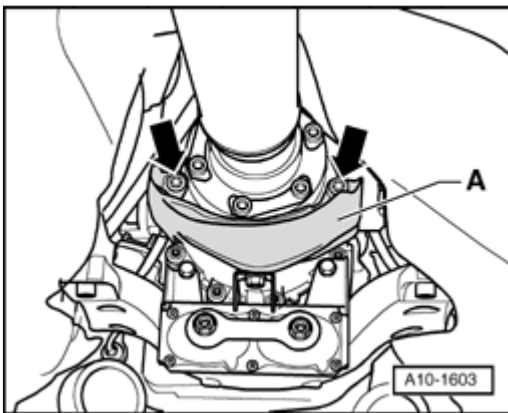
Removing/Installing Heat Shield For Driveshaft
